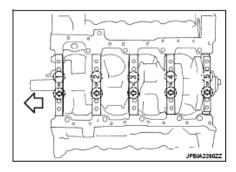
Identifying Main Bearing Caps Courtesy of NISSAN MOTOR CO., U.S.A.
